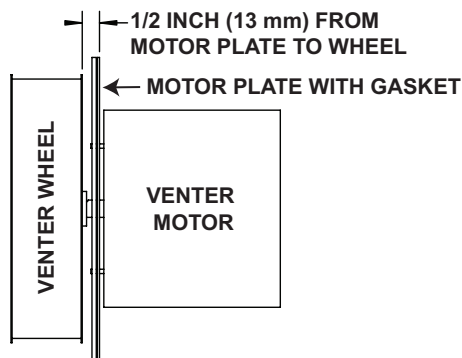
Venter Wheel Position on Shaft (Unit Sizes 130–310)
